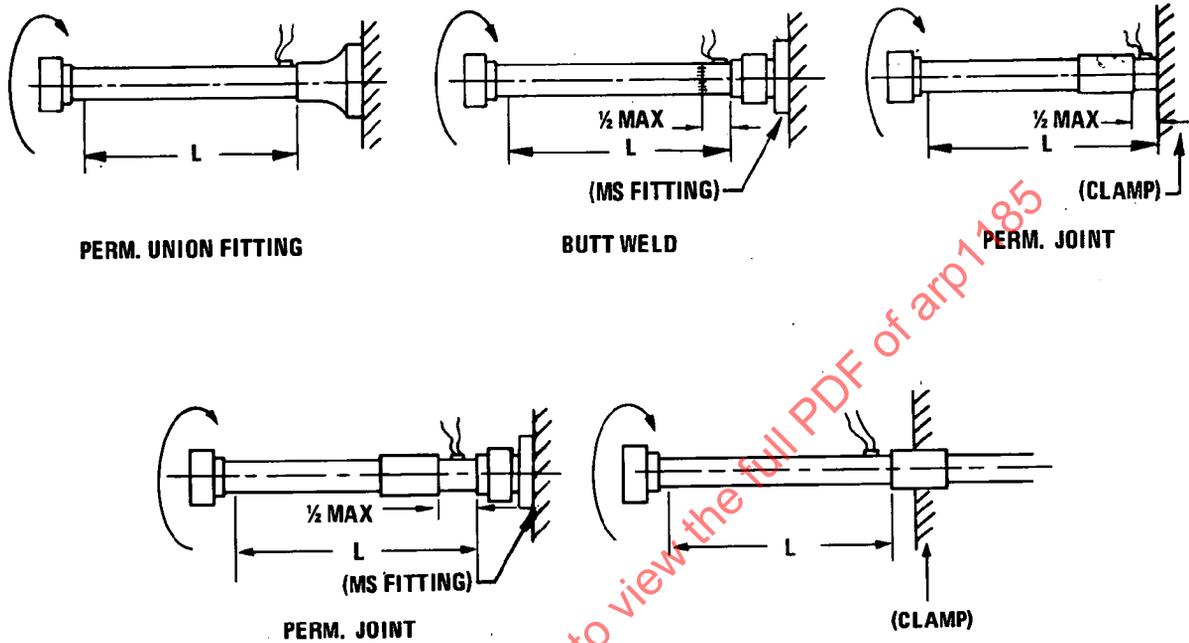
ALTERNATE SPECIMEN MOUNTING FOR PERMANENT JOINTS
